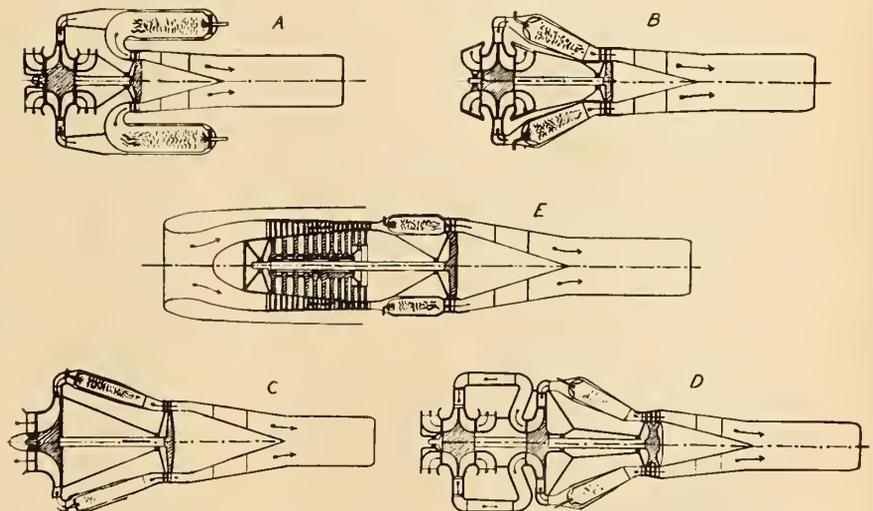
Five alternative arrangements for a jet engine. A—Double sided impeller—counter flow combustion; B—Double sided impeller—straight-through combustion; C—Single sided impeller—straight-through combustion; D—Two-stage centrifugal compression, straight-through combustion, two-stage turbine; E—Axial compression, straight-through combustion.
